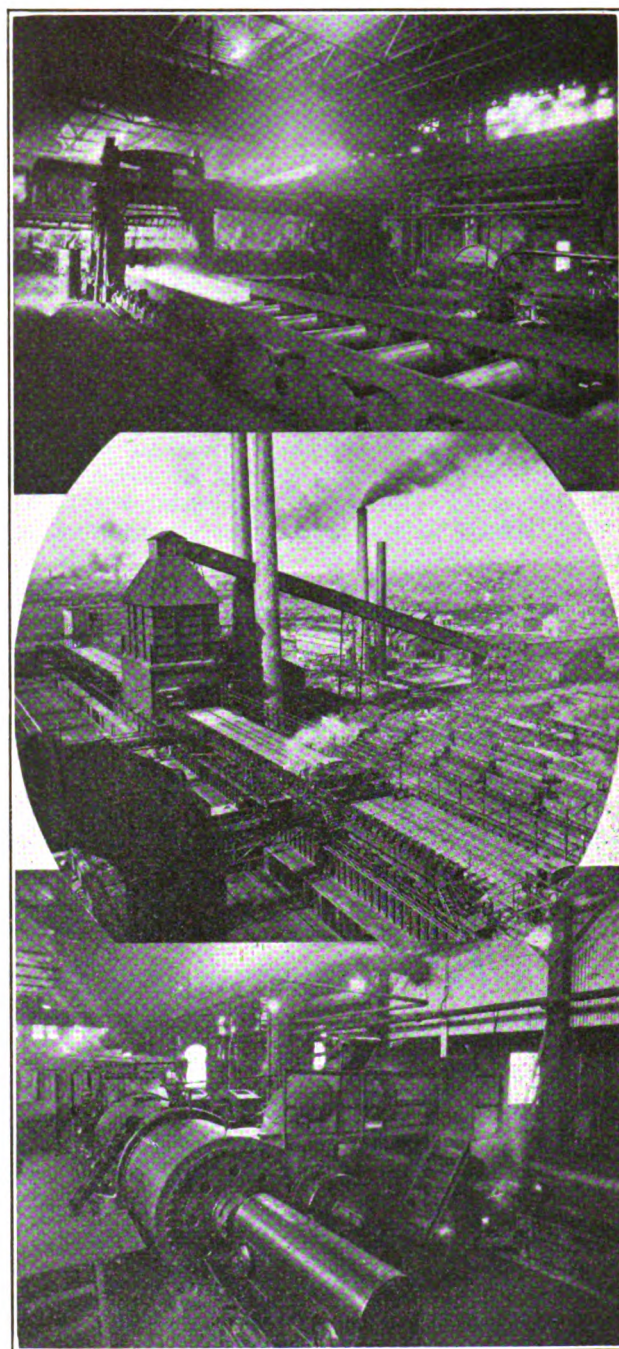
A view of the 35-in. blooming mill in operation, showing ingot on roll train. Middle—bird's-eye view of the by-product coke plant. Lower—the blooming mill engine recently installed.
